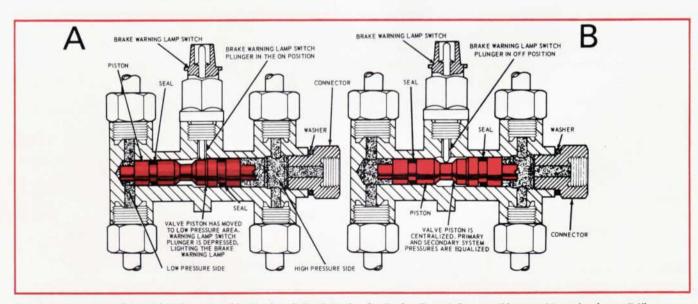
Pressure Differential Valve Assembly Used with Dual Hydraulic Brake (Drum) System. (Note position of valve at "A" causing switch to close contacts and light warning lamp.)
